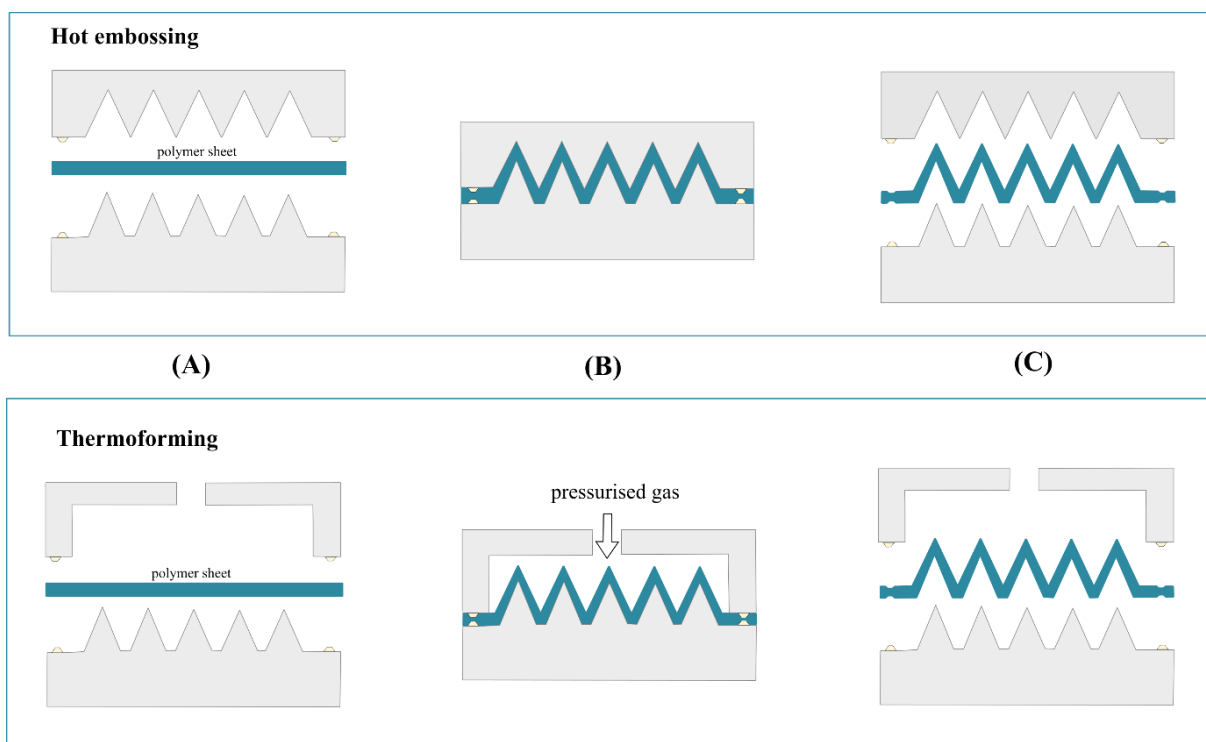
Principles of hot embossing (up) and thermoforming (down) (modified from Hecke and Schomburg, 2003). (A) The polymer sheet is placed between two inserts, (B) sealed and heated up above glass temperature. (C) In hot embossing, the desired shaped is obtained by mechanical compression of the mold and the counter mold, while in thermoforming uses a pressurized gas or vacuum
